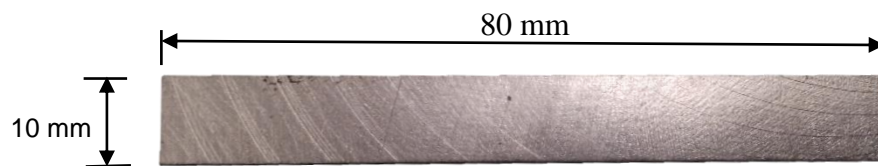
Corrosion and stress-corrosion sample geometry.
